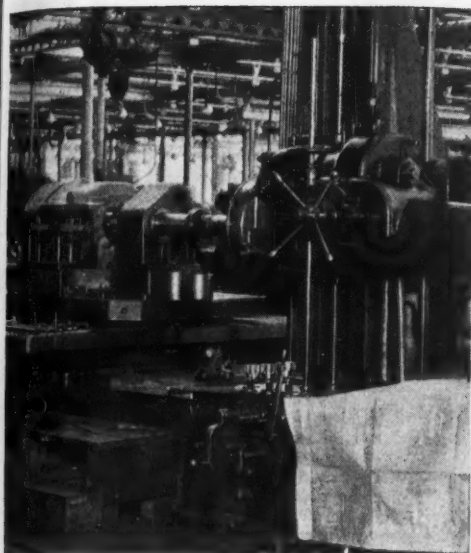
Boring spindle carriers on a Giddings & Lewis horizontal boring mill.
